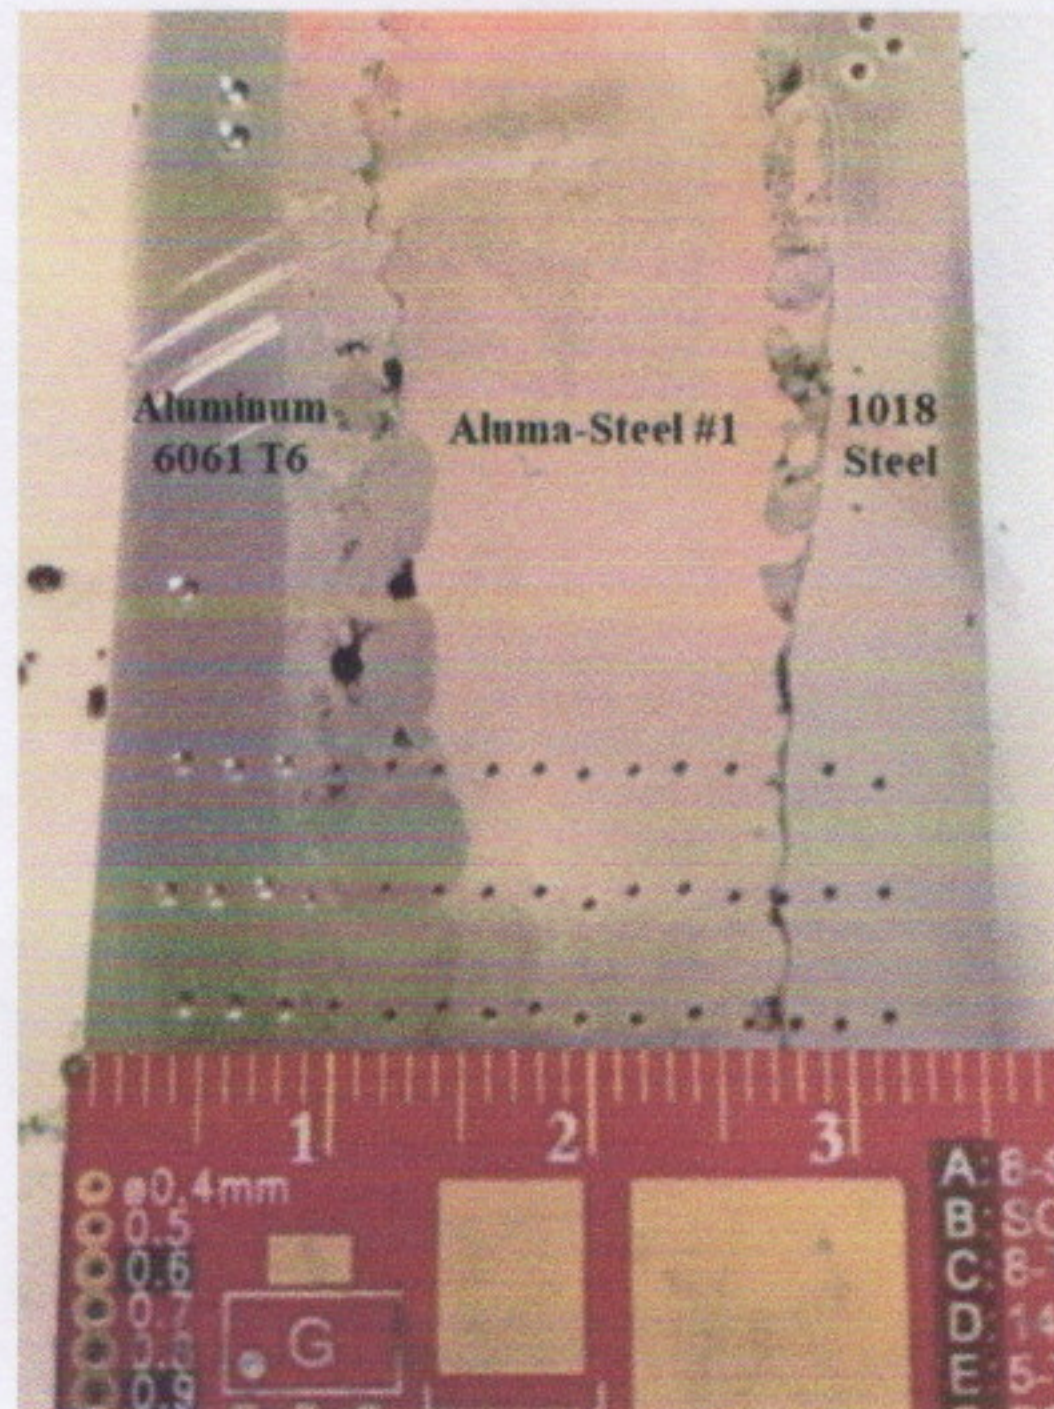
Rockwell Hardness indentations of the single rod weldment sample
